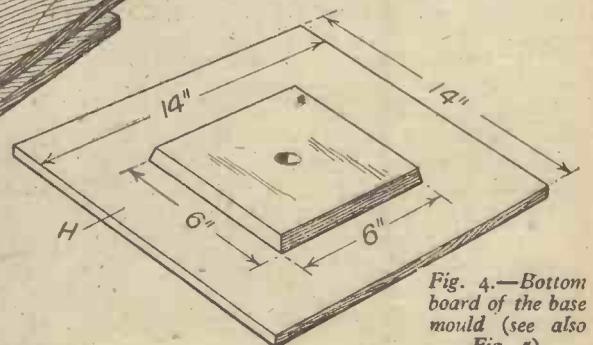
Bottom board of the base mould (see also Fig. 5).
